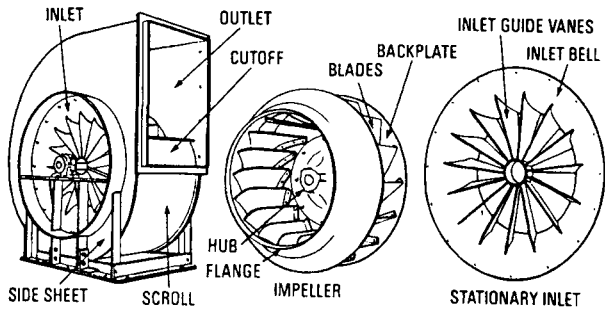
B. Exploded view of a centrifugal fan. (Used by permission: Jorgenson, R., Ed. *Fan Engineering*, ©1983. Buffalo Forge Co., Div. Howden Fan Co. All rights reserved.)
